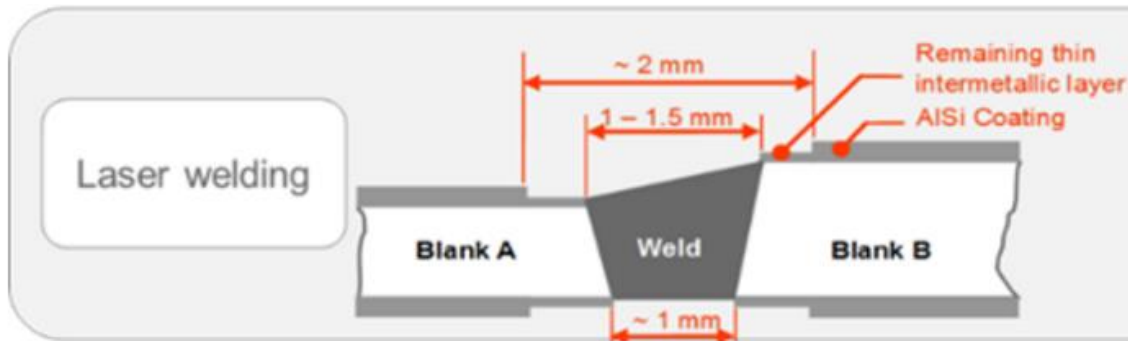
Laser welded blank of AlSi coated material with different sheet thicknesses, from ArcelorMittal [24].
